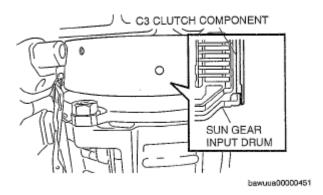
Inspecting C3 Clutch Component Courtesy of MAZDA MOTORS CORP.
